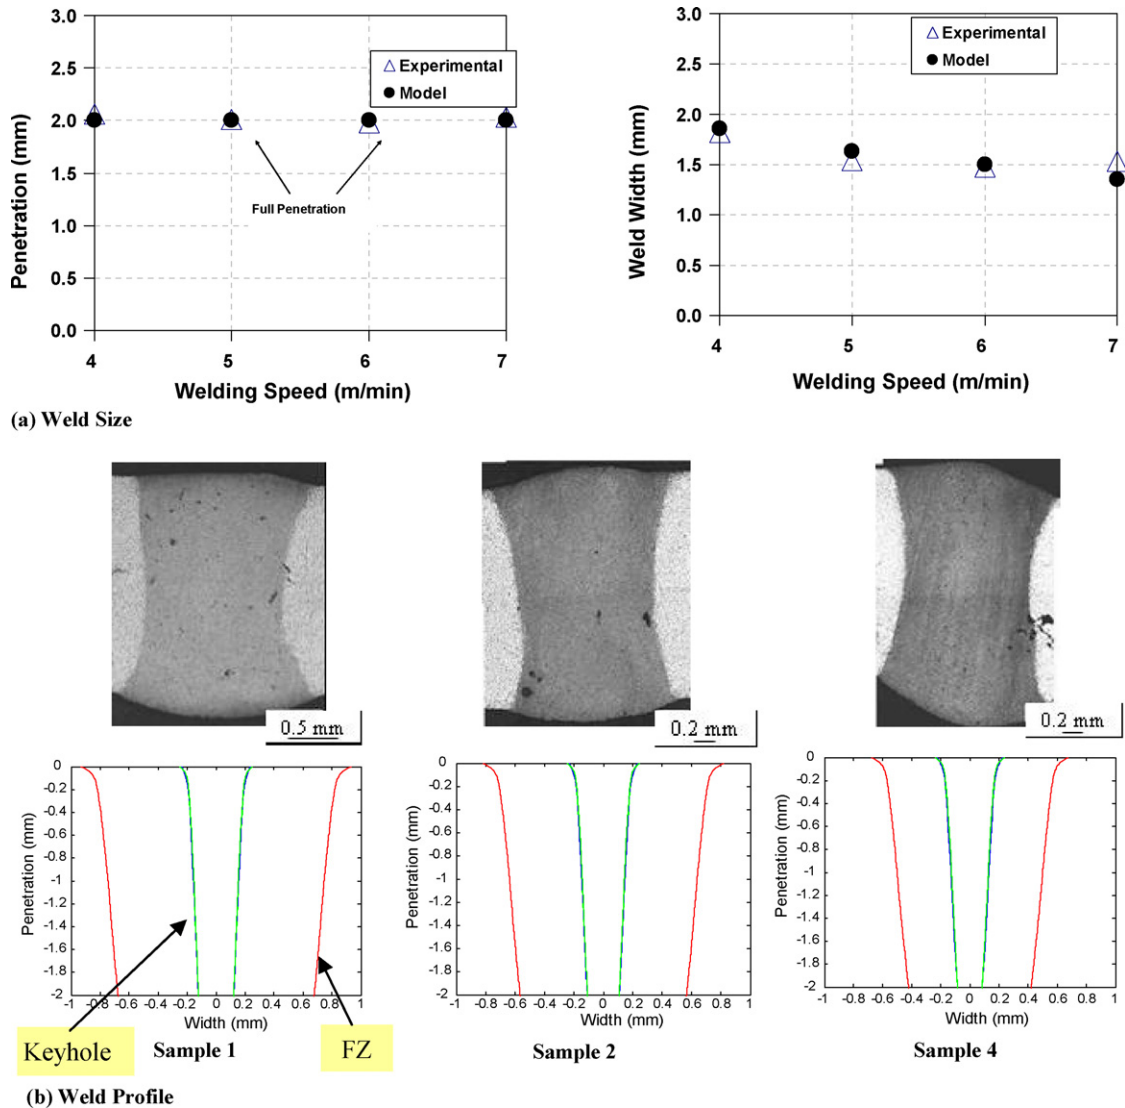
Comparison between (a) experimental and (b) calculated weld geometry for laser welding of 2 mm plates at variable welding speeds.
